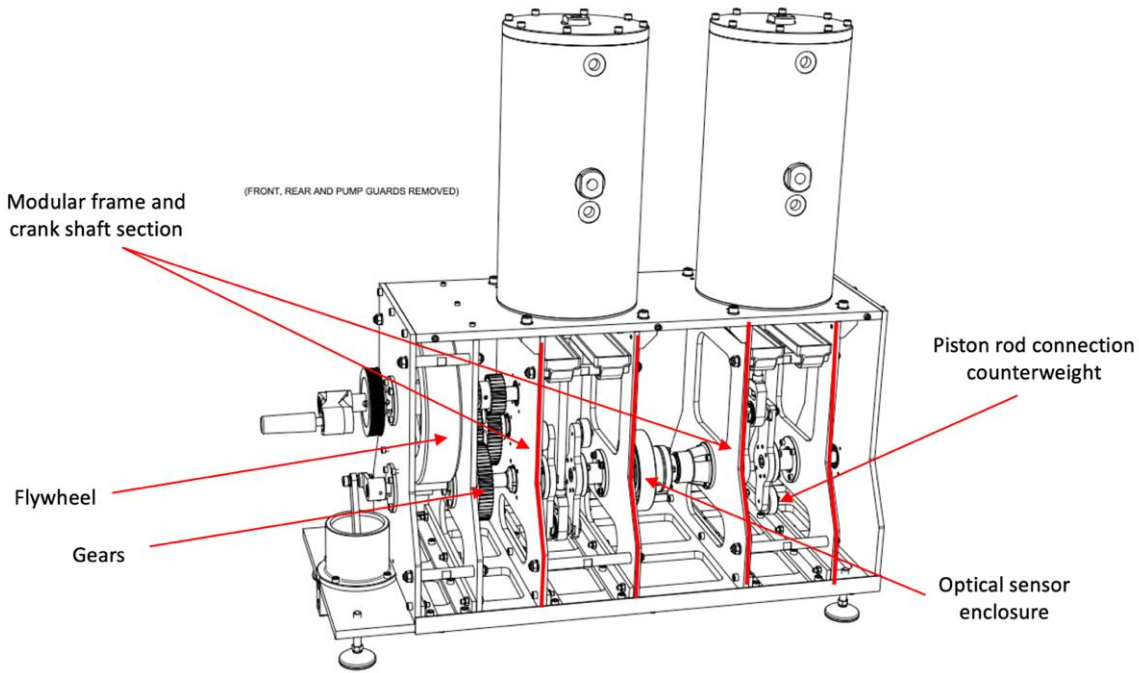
Section of ‘Assembly of MK.IV Condensing Engine’ technical drawing produced by the University of Southampton EDMC for this project. Section annotated to show modular nature of design as well as highlight key crankshaft components.
